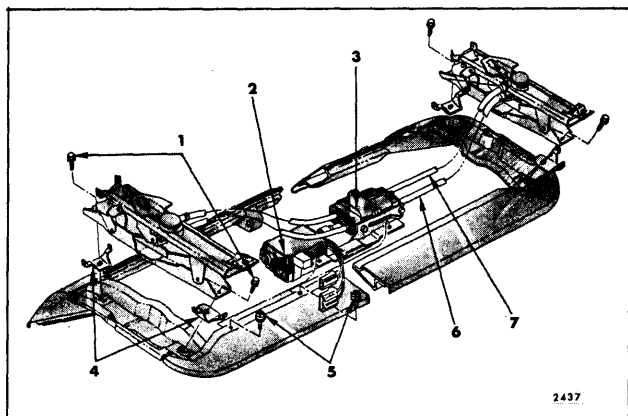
Front Seat Adjuster, Motor and Transmission - "A" Styles - Four-Way Adjusters
